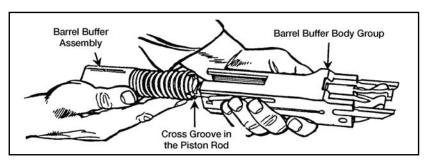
Removal of the barrel buffer assembly
